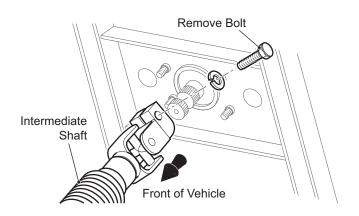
Disconnect Intermediate Shaft to Center Steering Wheel
